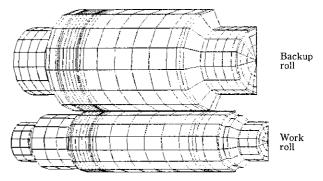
Finite element model of the roll of work roll shift mill for 3 dimensional contact analysis
